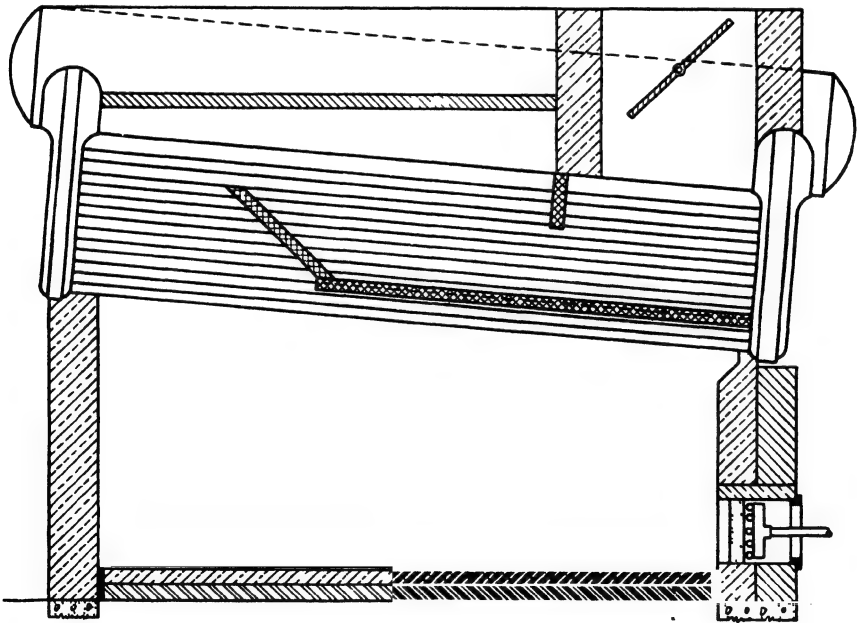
Straight-tube inclined-drum type of water-tube boiler with box headers. (Courtesy of Webster Engineering Company)
